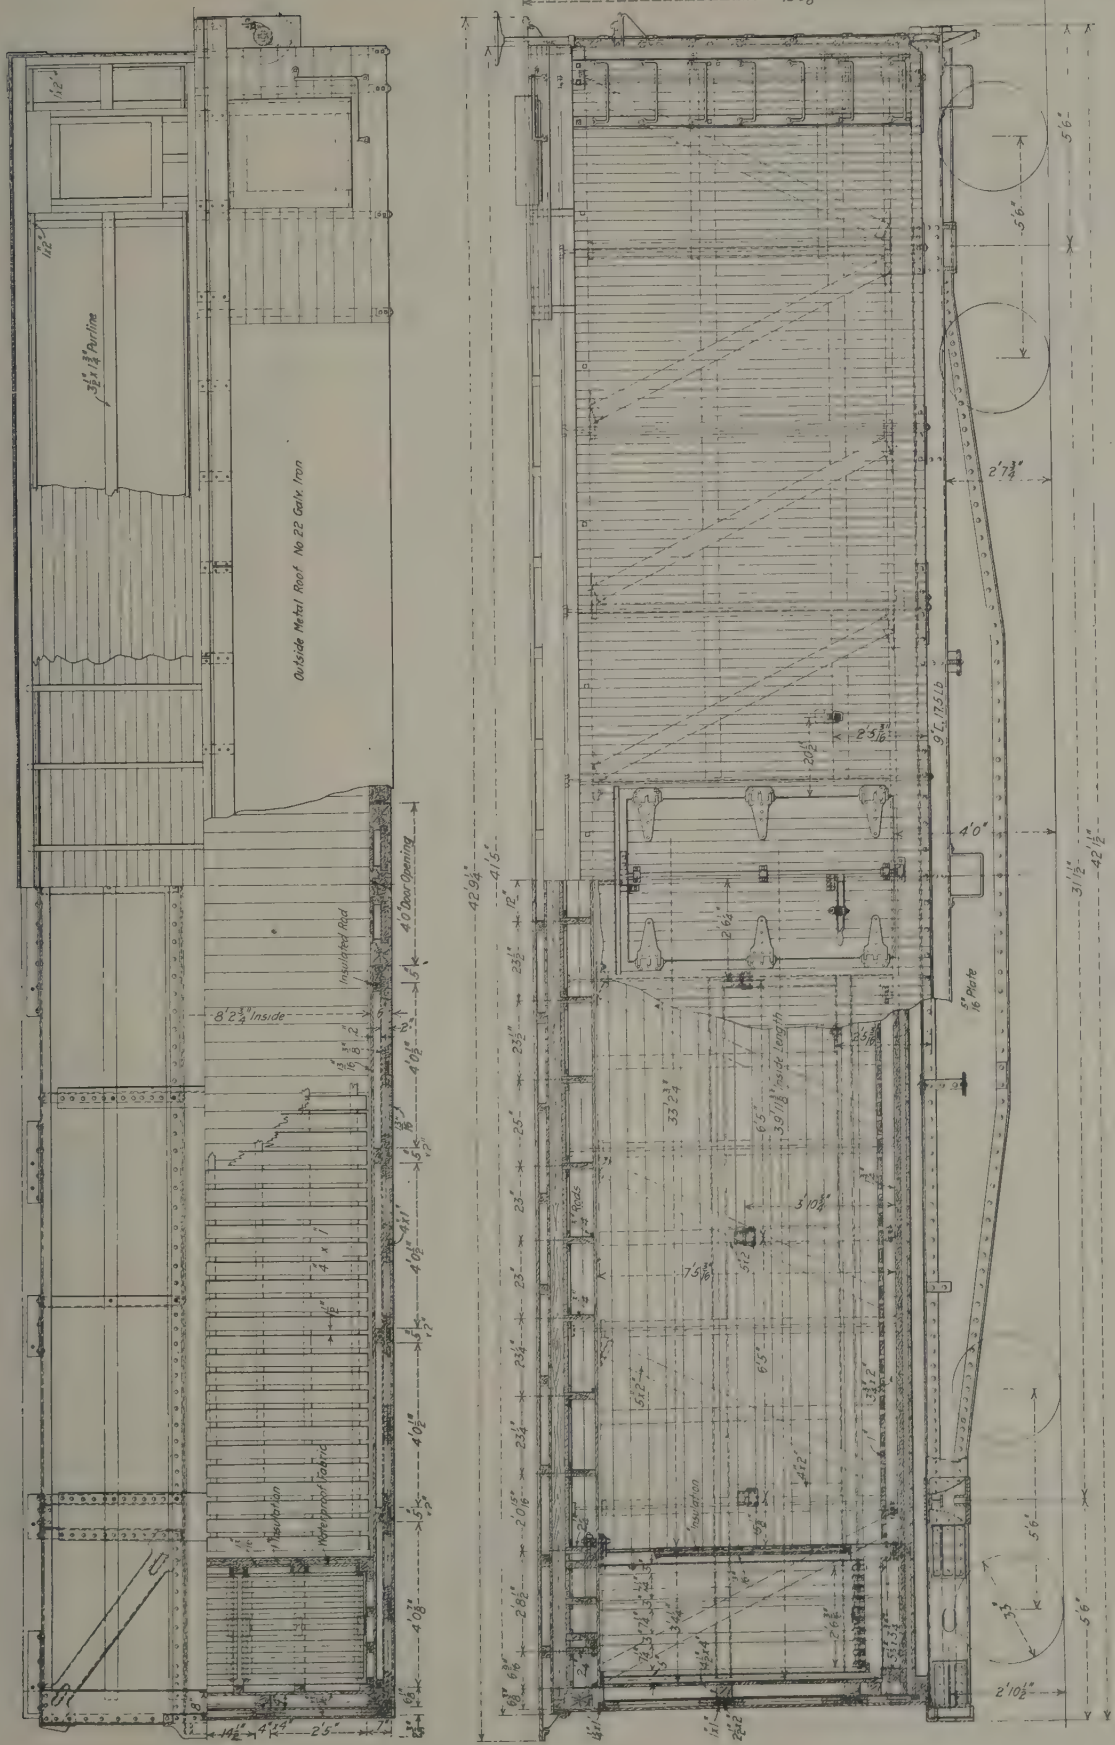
Elevation and Plan of U. S. R. A. Standard Refrigerator Car.
